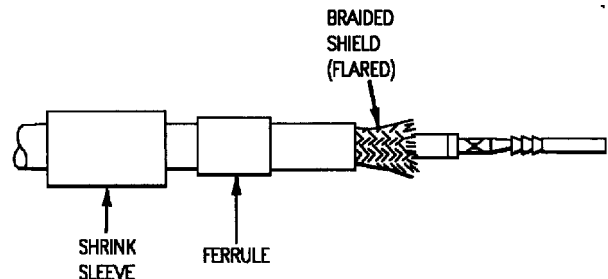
M24266R22B32PN Coaxial Assembly Procedure (Sheet 1)
